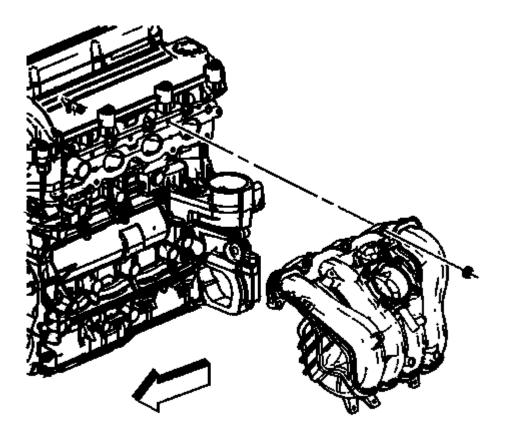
Intake Manifold Studs Courtesy of GENERAL MOTORS CORP.
